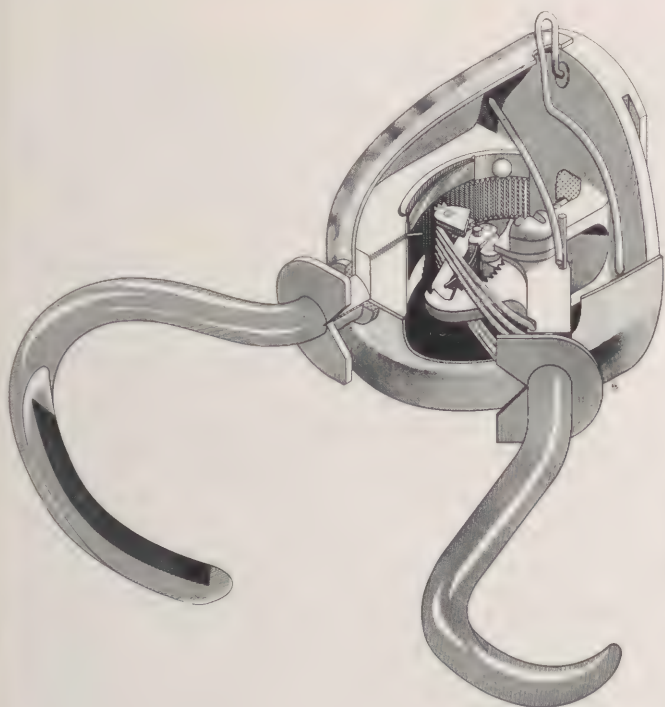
Pull-to-close hook with force multiplier and locking mechanism.
